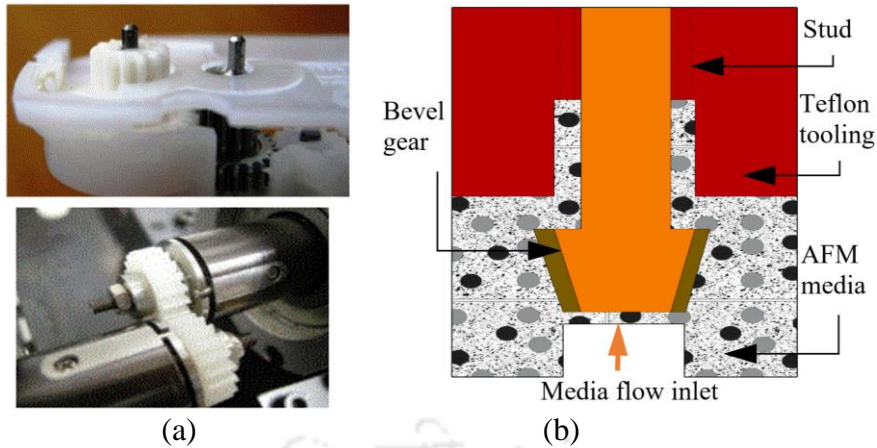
(a) Application of plastic gear [52] and (b) tooling setup for bevel gear finishing by AFM [83]
